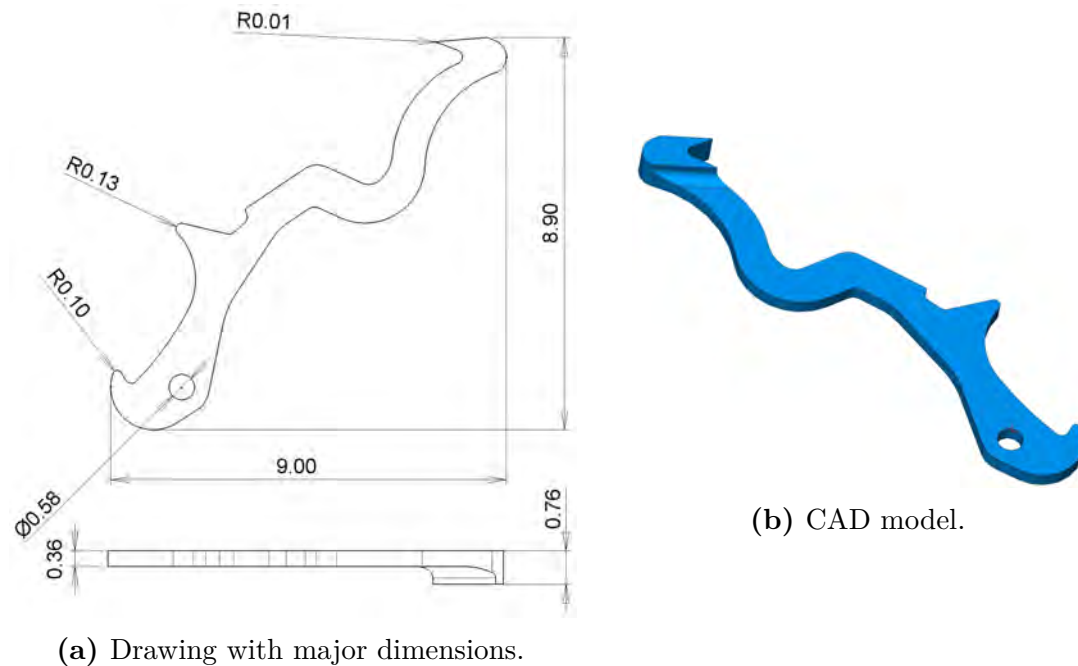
Drawing and CAD model of the ceramic lever for a micro-mechanical system [141]. All dimensions in mm.
